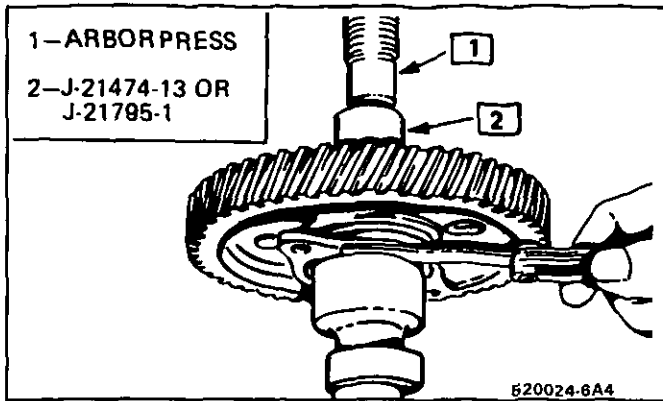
Camshaft Timing Gear/Thrust Plate End Clearance
